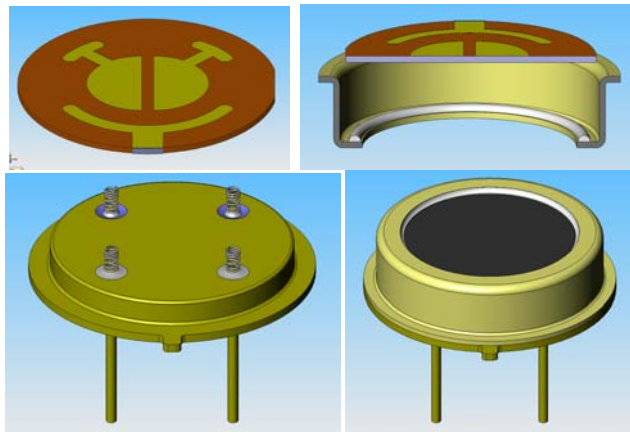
Packaging of the langasite MCF sensor starts with a polyimide wrap of the ground contact (top left) followed by epoxy die attach (top right). The package is affixed with springs (bottom left) that connect to the sensors pads via conductive epoxy. The sensor element is vacuum baked and then weld sealed (bottom right).
